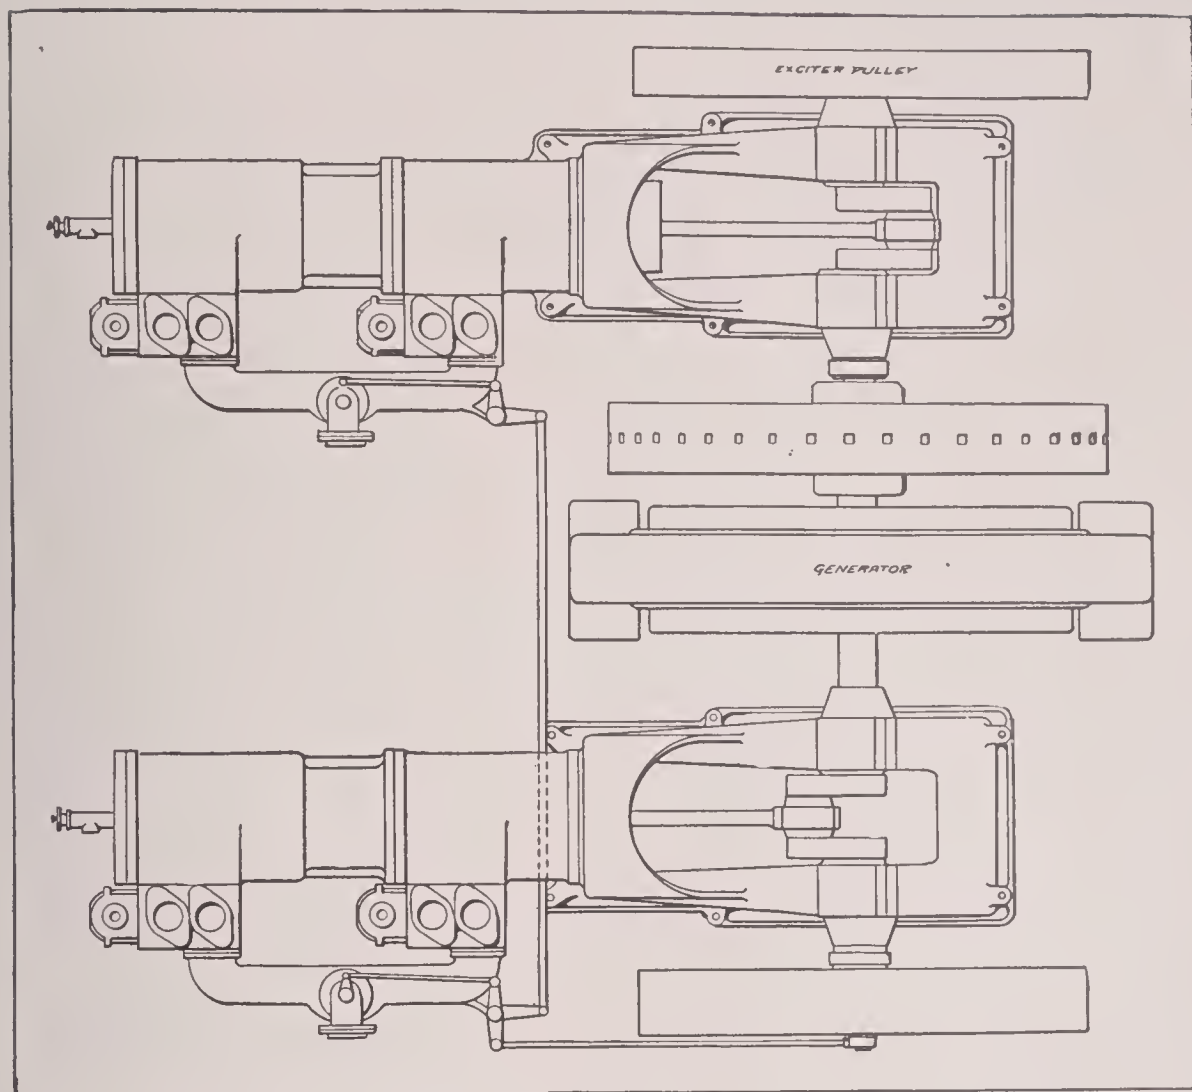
Twin-unit Alberger Single-acting Tandem Engine.
